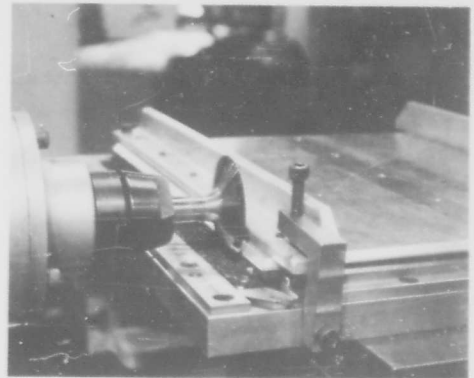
Cutting Step in D-36 Columbium Honeycomb Core for Heat Shield Panels
